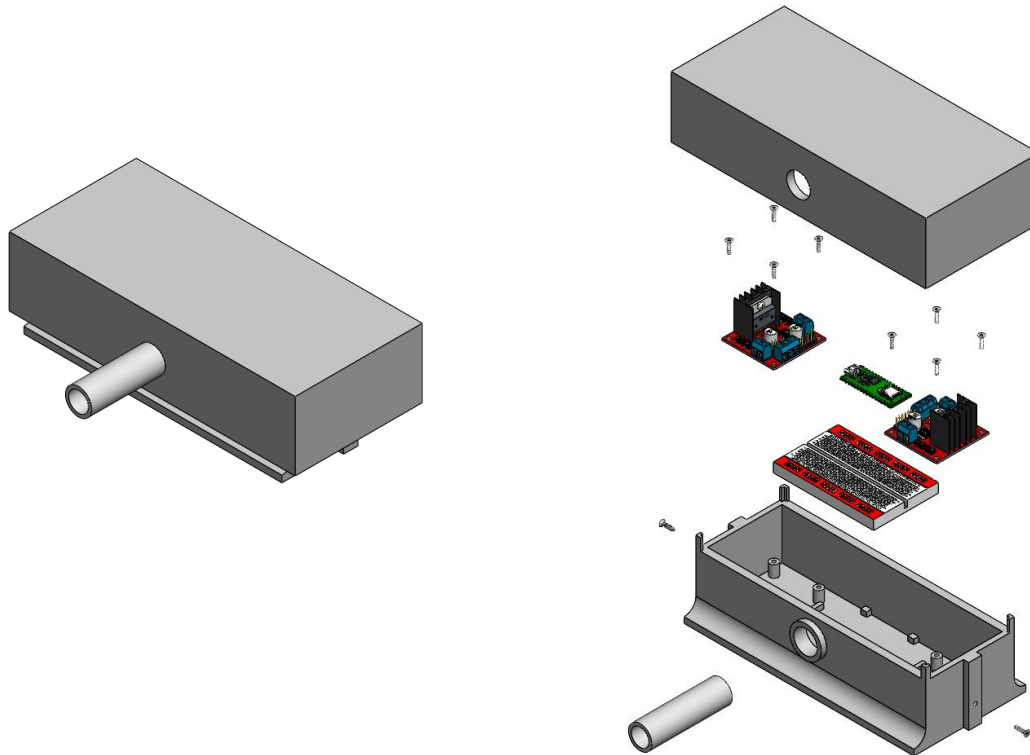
Collapsed (left) and Exploded (right) views of full microcontroller assembly and housing.
